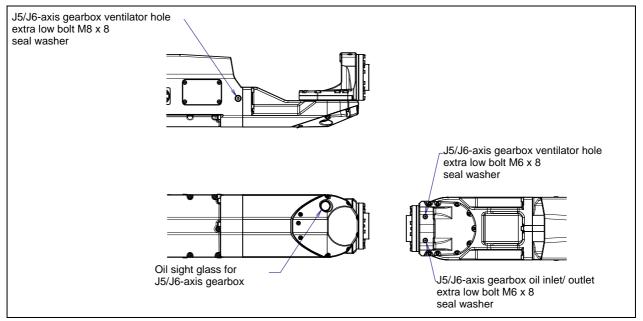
(b) Oiling point of J5/J6-axis gearbox (A05B-1225-B271, B272, B281, B282)
